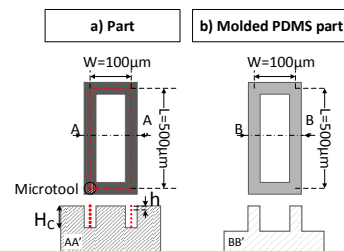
(a) Dimensions of the machined part. (b) Molded part.
